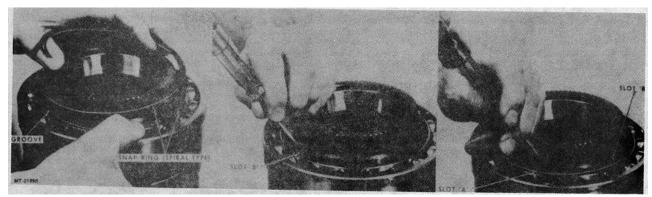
Procedure for Installing Spiral Type Snap Ring
